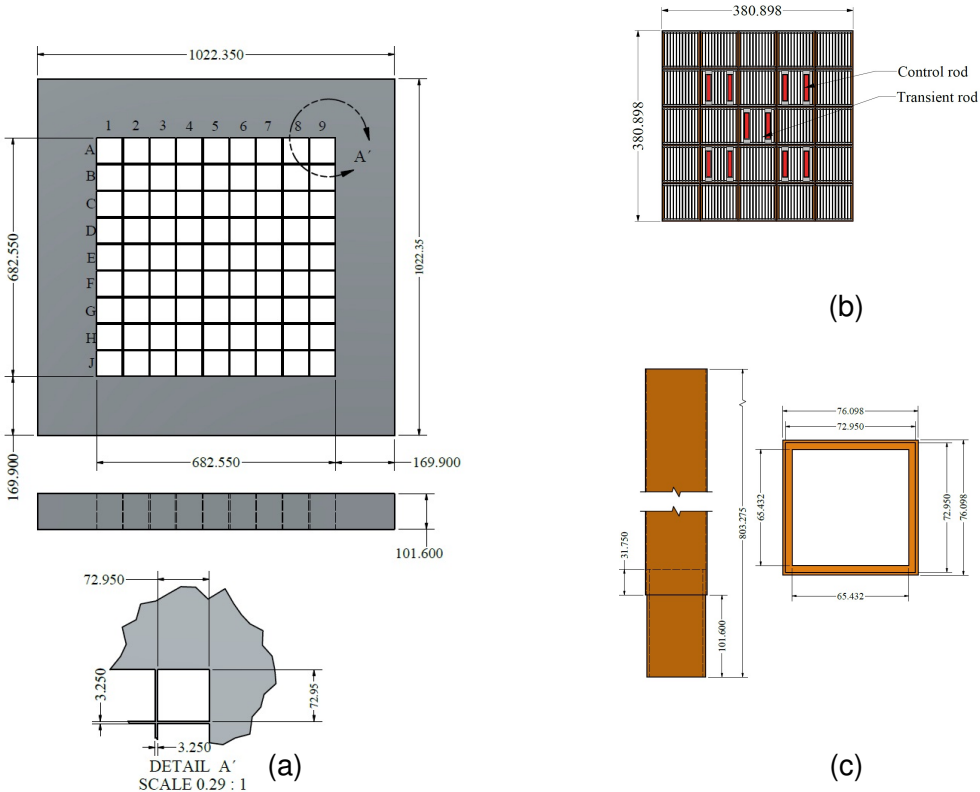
SPERT-IV dimensions in mm of: (a) lower grid assembly; (b) core; (c) assembly can
